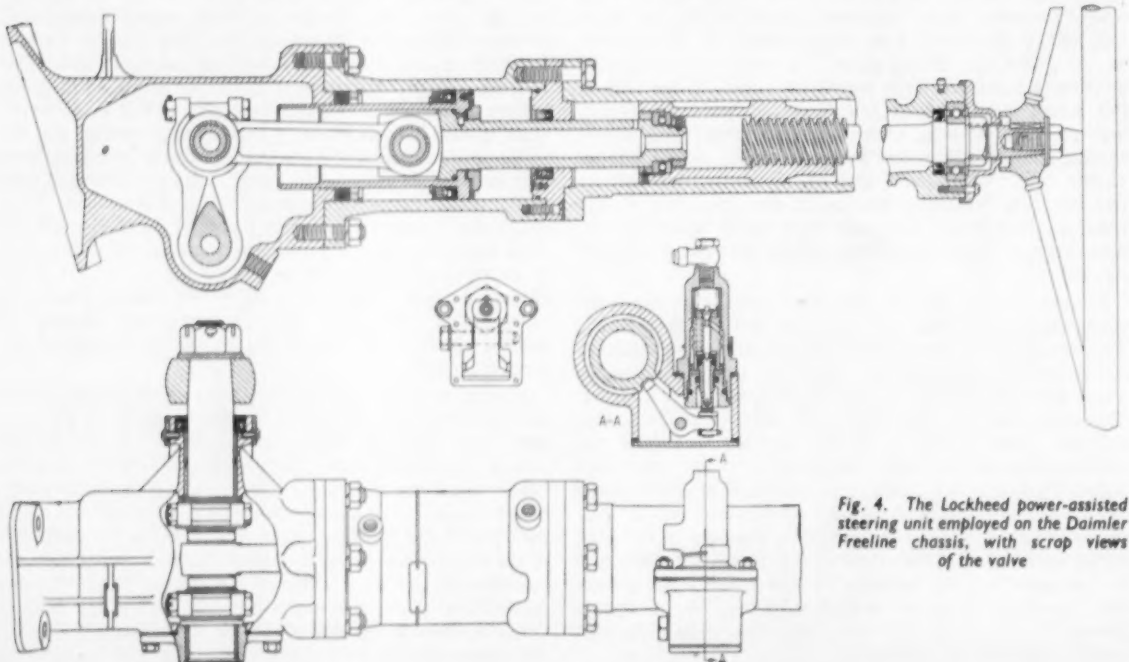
The Lockheed power-assisted steering unit employed on the Daimler Freeline chassis, with scrap views of the valve
